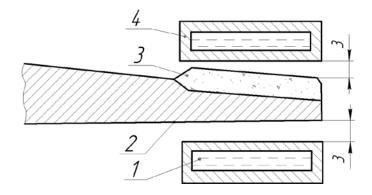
The scheme of induction welding of share blade with dust-like hard alloy: 1 – cooling liquid; 2 – share; 3 – charge mixture; 4 - inductor
